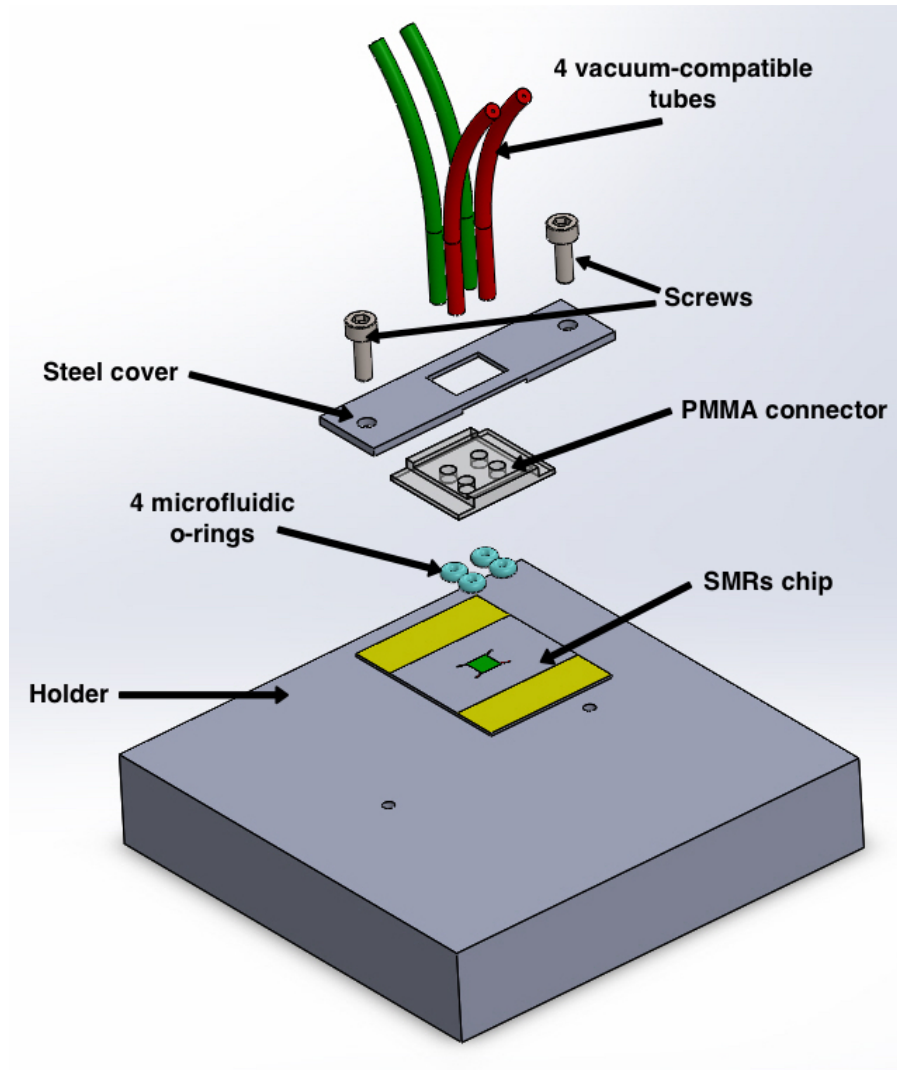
Exploded SolidWorks view of the first interface design thought. All the components used are described.
